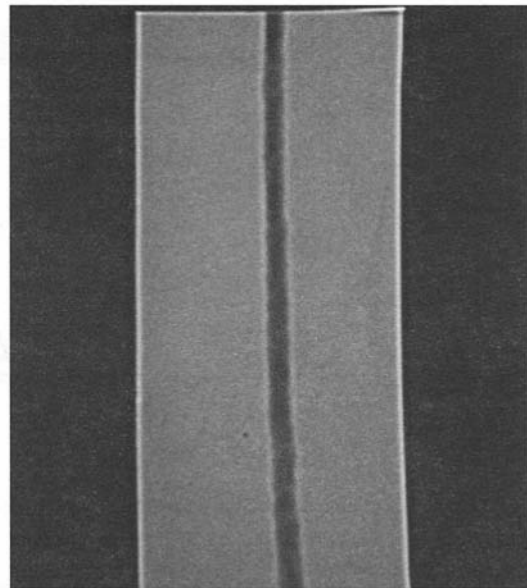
X-ray analysis of a GTA weld in 1.6 mm Ti-6Al-4V sheet
